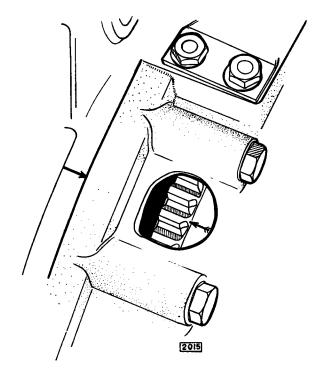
Showing the location of the Top Dead Centre marks on the left-hand side of the combined engine and transmission unit.
